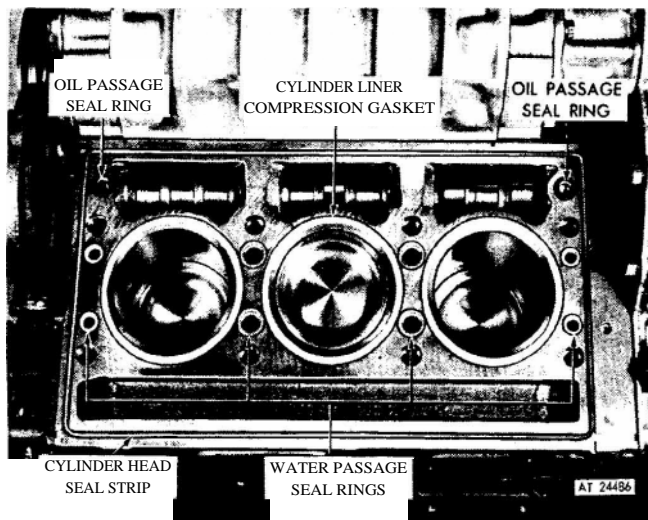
Cylinder head gaskets and seals in place on cylinder block.
